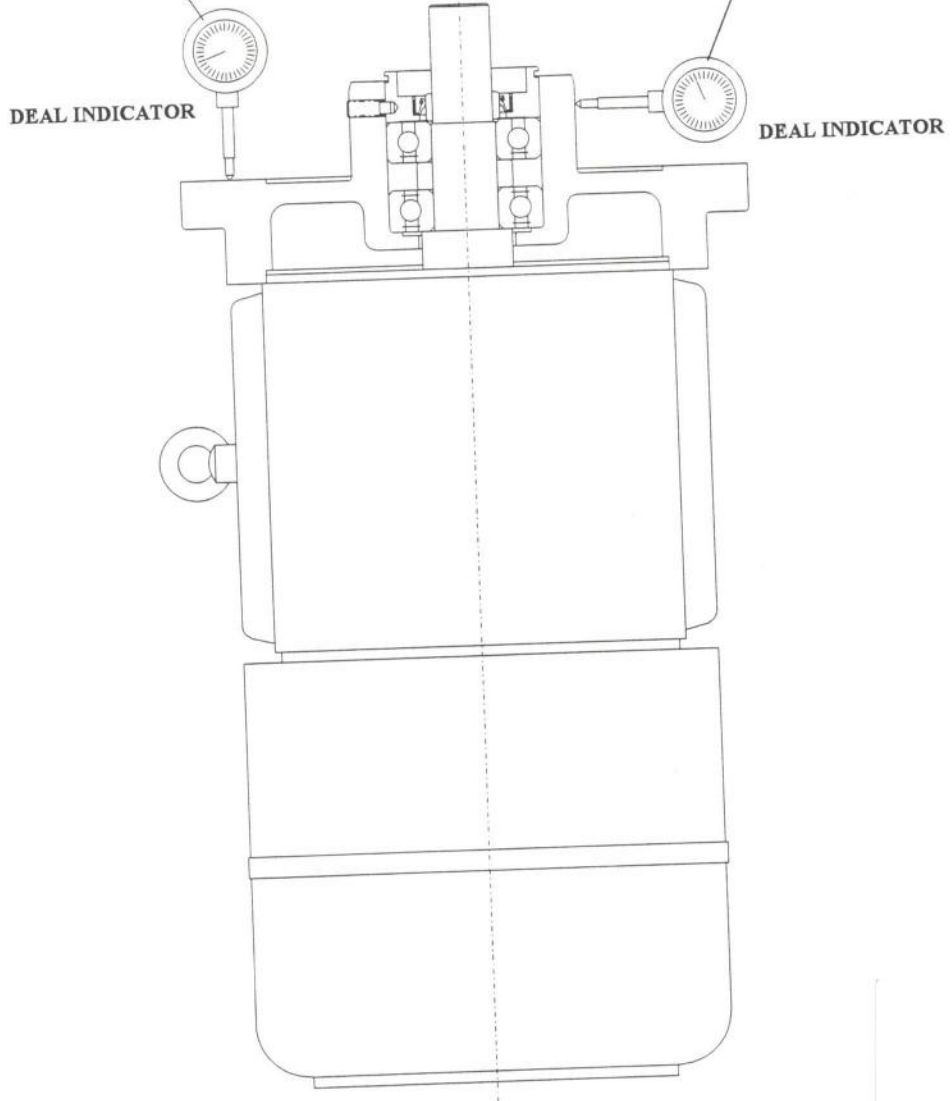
Geometric Tolerances for the Electrical Motor Assembly
